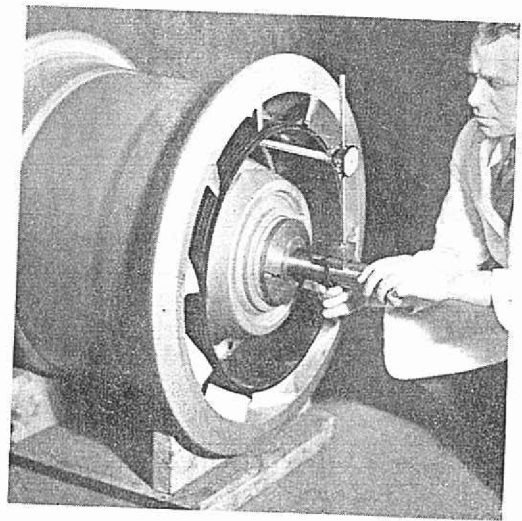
Measuring equipment rotated on dummy shaft; wheel stationary
